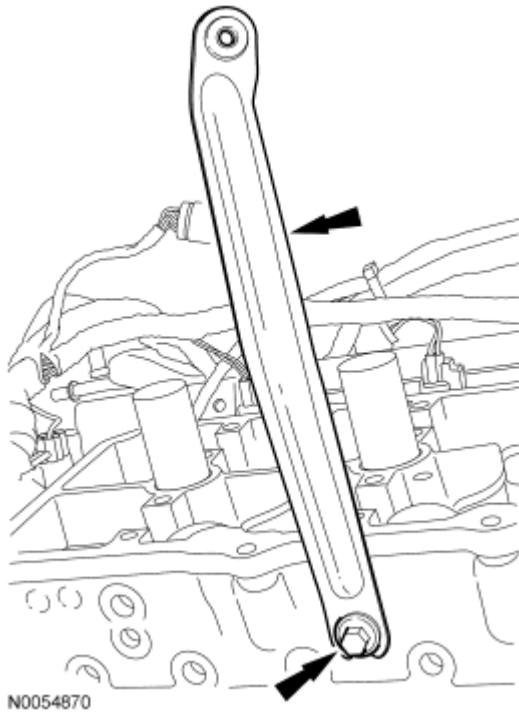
Locating Upper Intake Manifold Bracket & Bolt
